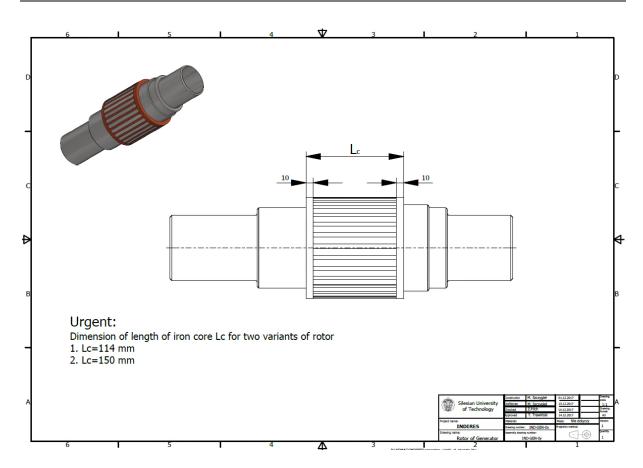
Dimensions of the Rotor Iron Core for Two Variants of Iron Length
